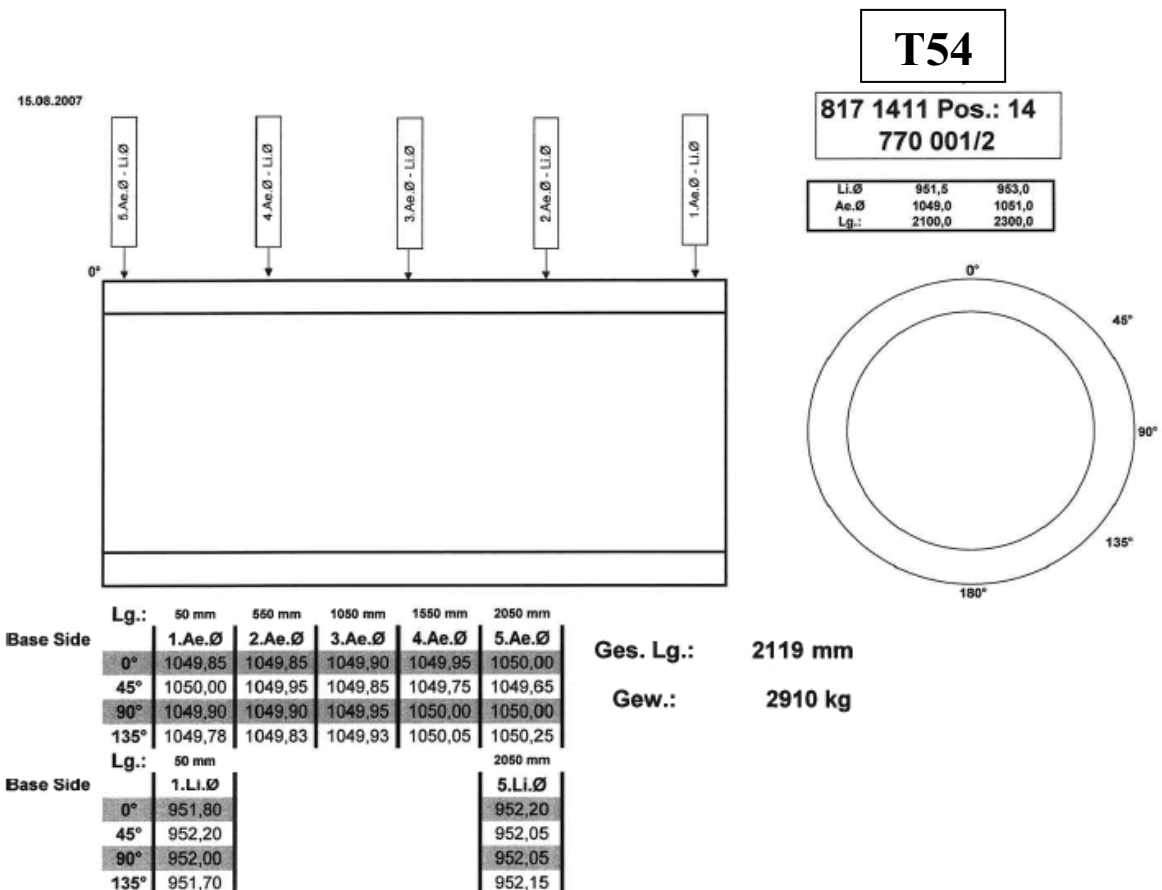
The dimensional control results of the bottom part of the T54 cylinder after machining.
